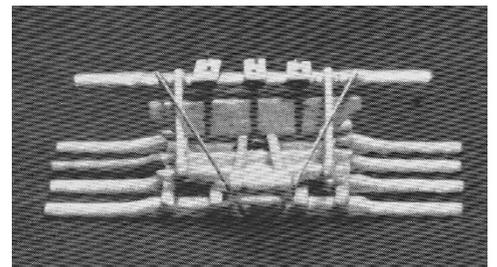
Axle assembly is mounted onto the 5<sup>th</sup> wheel braces with the brass wire and paper braces glued to the axle bearing.
